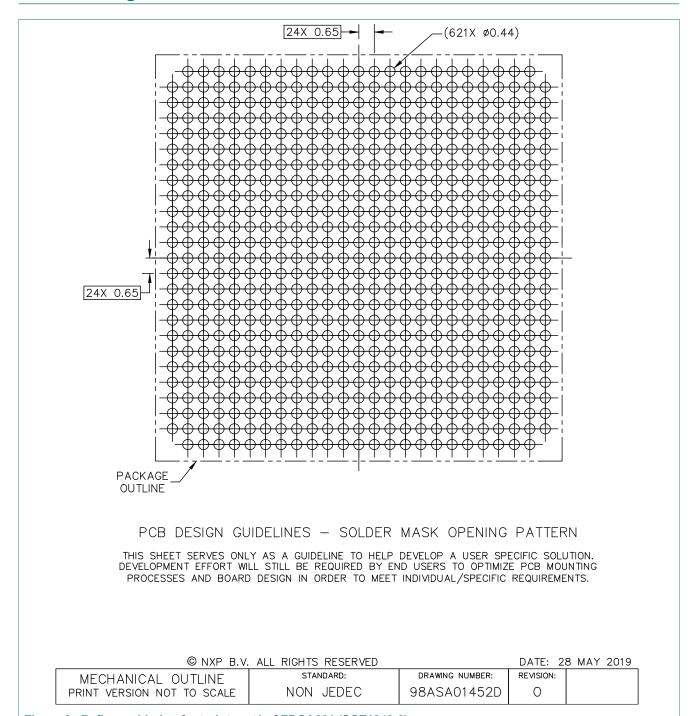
Reflow soldering footprint part1 of FBGA621 (SOT1840-6)
